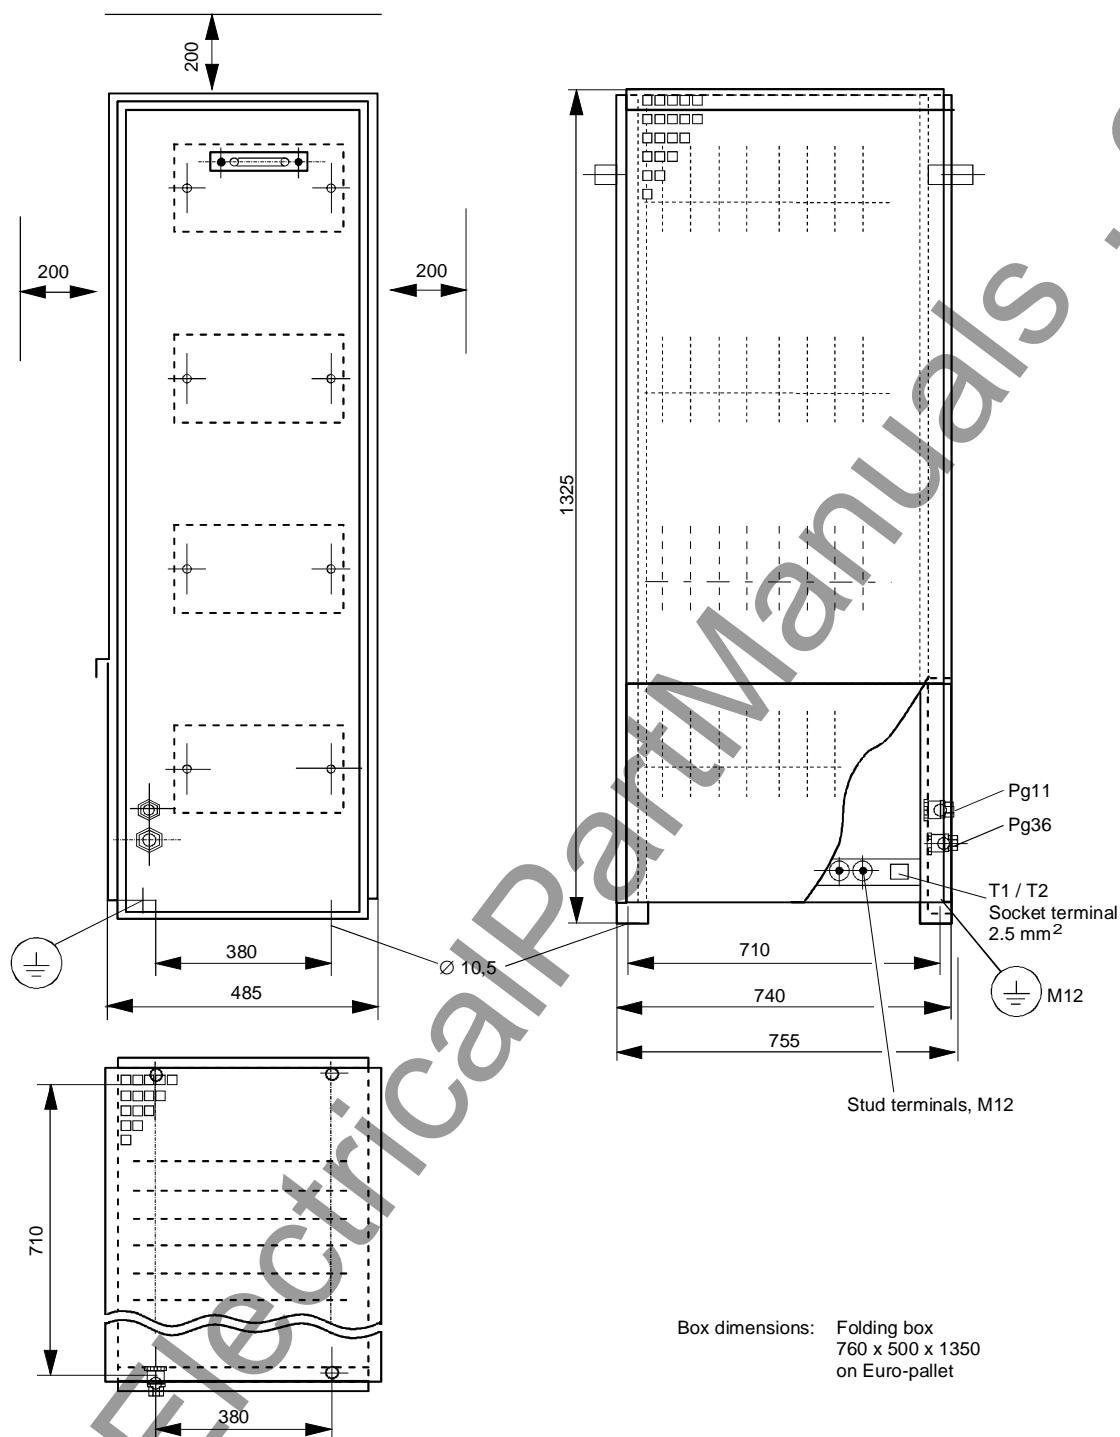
Mounting diagram, brake resistor for floor mounting
